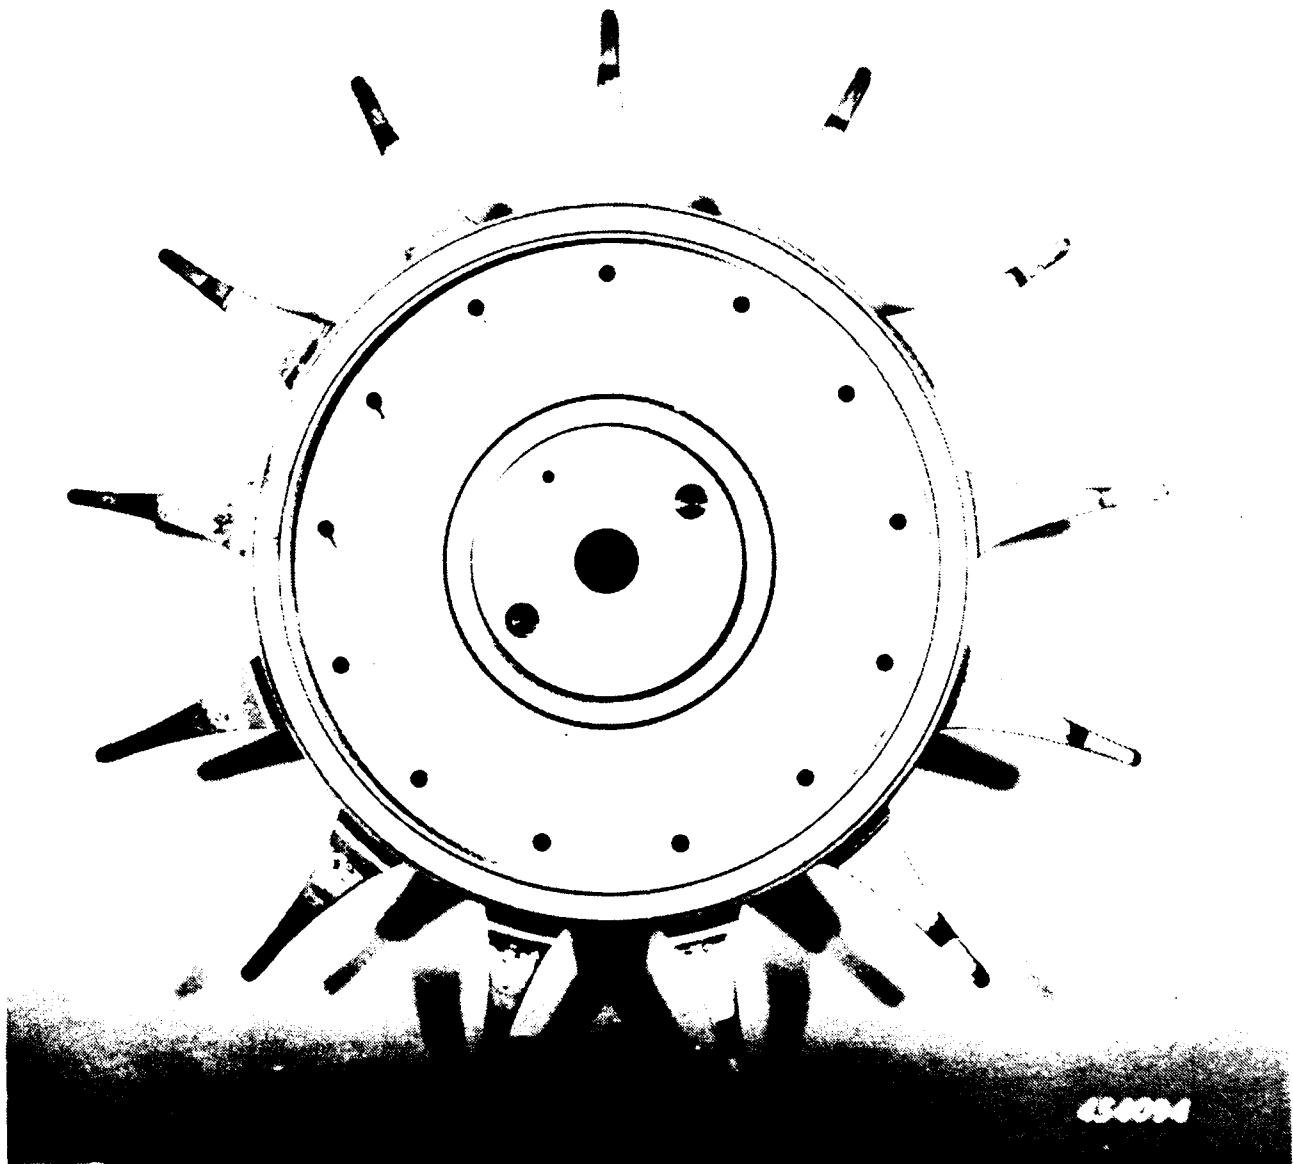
FINAL MACHINED AIR-COOLED TURBINE ROTOR
